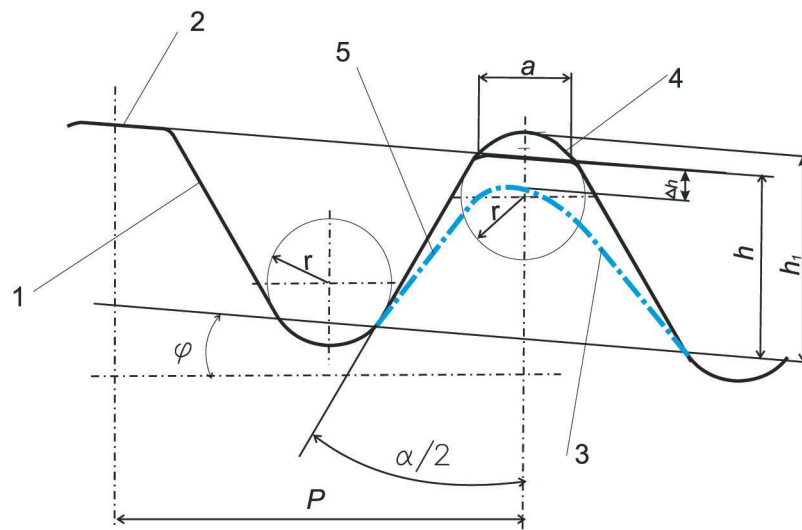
Diagram graphically illustrating shape of worn thread due to contact pressures and friction of its surfaces as result of installation of pin into box and their screwing: 1 – larger standard flank profile of thread, 2 – crest according to standard, 3 – profile of larger flank profile after prolonged exploitation, 4 – standard root of thread, 5 – profile of lower thread flank after prolonged exploitation
